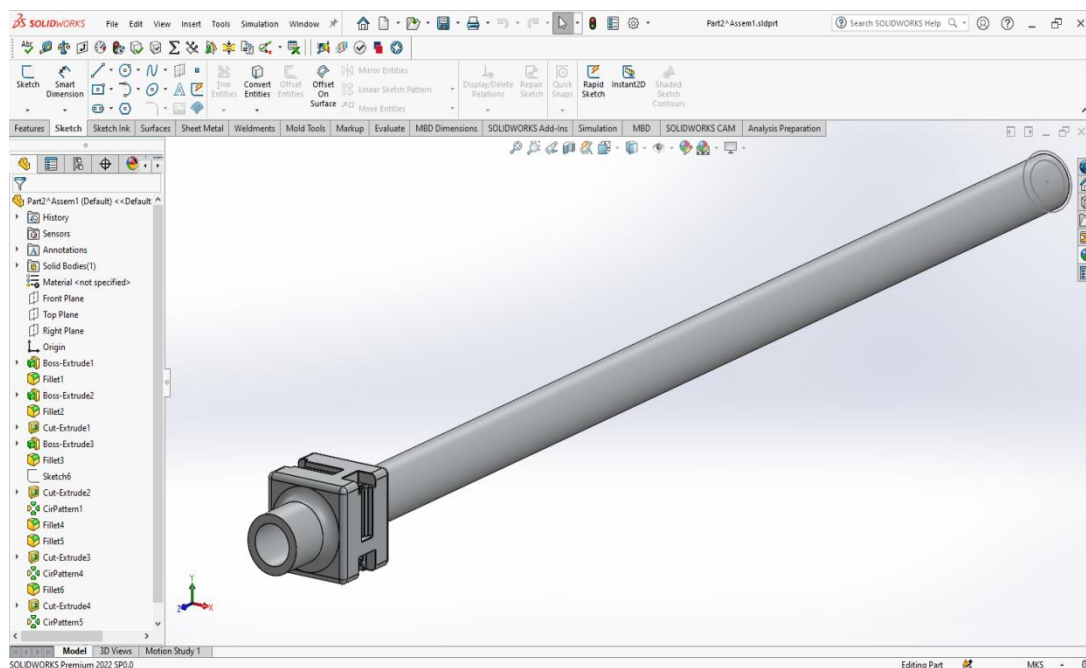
3D Representation of the push-pull rod and yoke assembly
